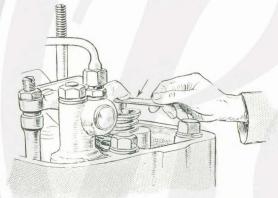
A VALVE CLEARANCE GAUGE IN USE.
